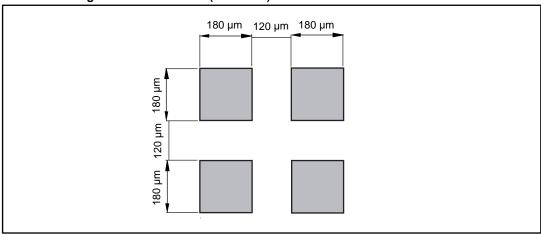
STSTAMP™ (0.47x0.47) mm² recommended solder stencil
